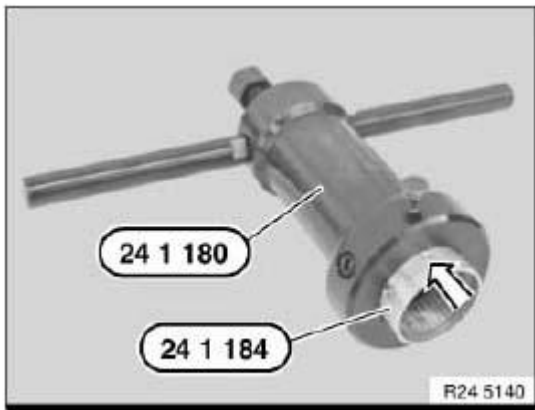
Sliding Special Tool 24 1 184 Into Extractor 24 1 180
